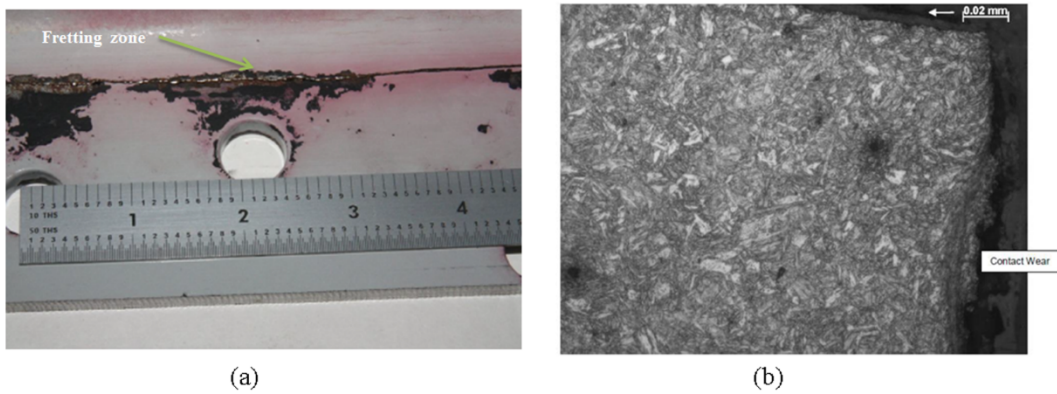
(a) Fretting induced wear seen below central bolt hole on frame (b) Magnified view of the fracture initiation site, contact wear visible along initiation site.
